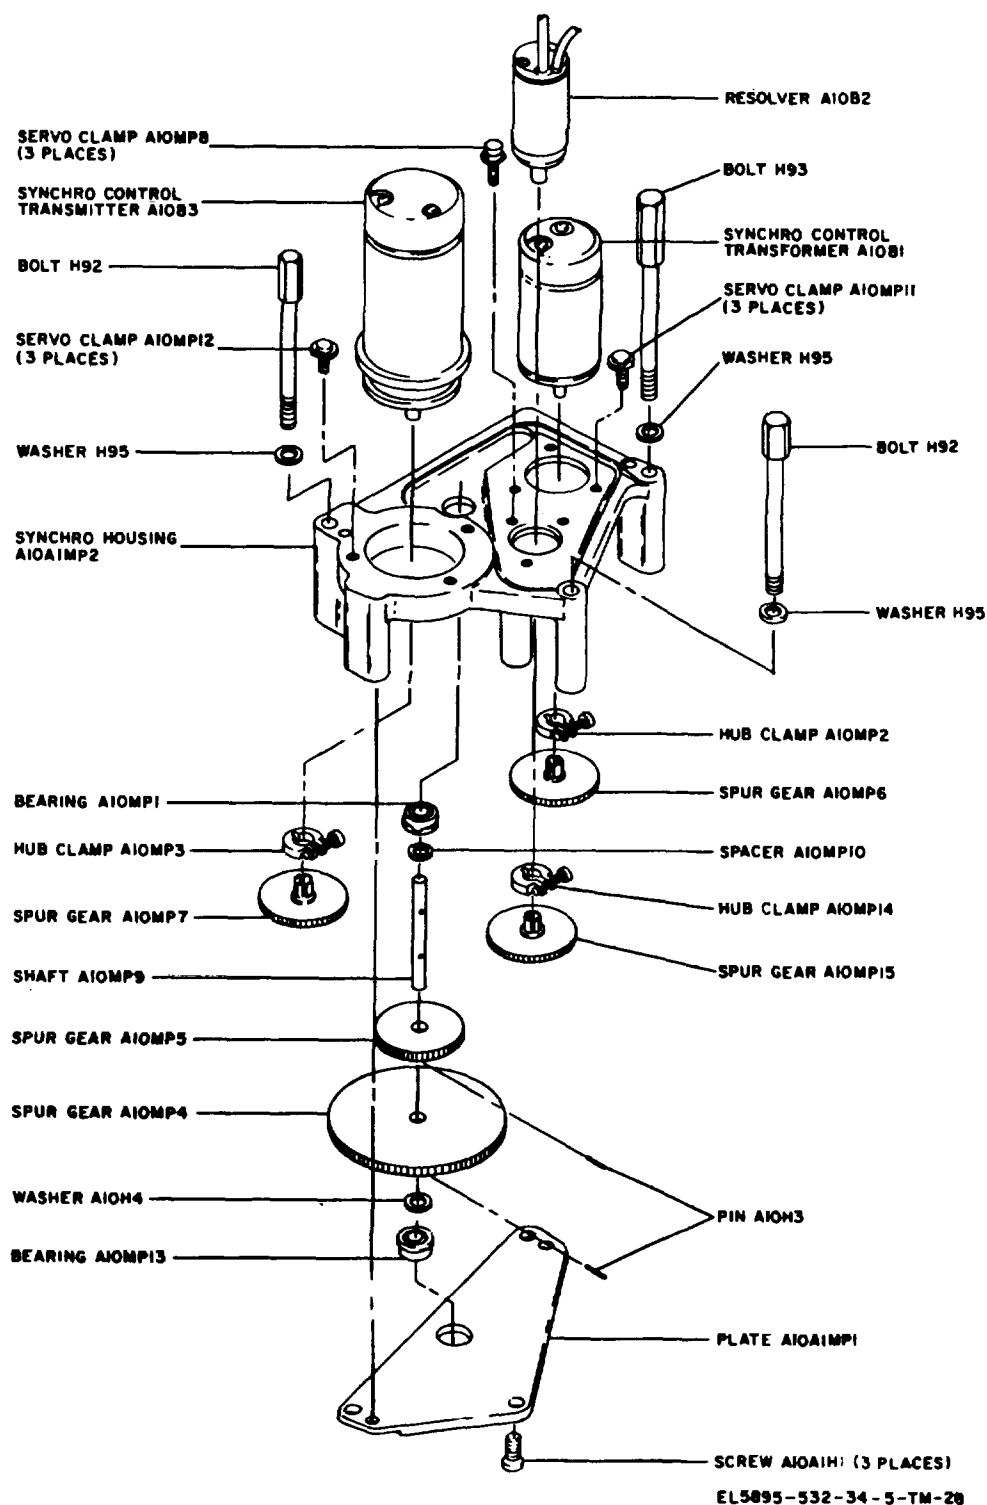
Synchro subassembly A10 assembly and disassembly.
